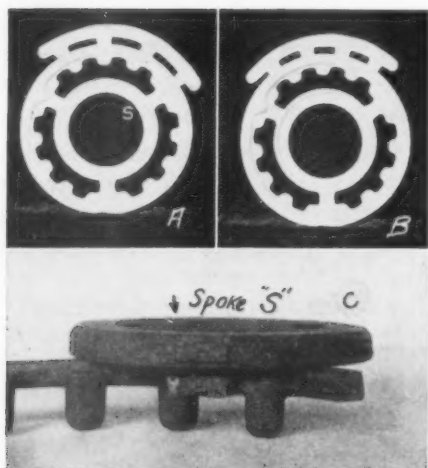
(A) INCORRECT GATING OF GEAR BLANKS. (B) CORRECT GATING OF GEAR BLANKS. (C) SHRINK CAVITY IN SPOKE.
